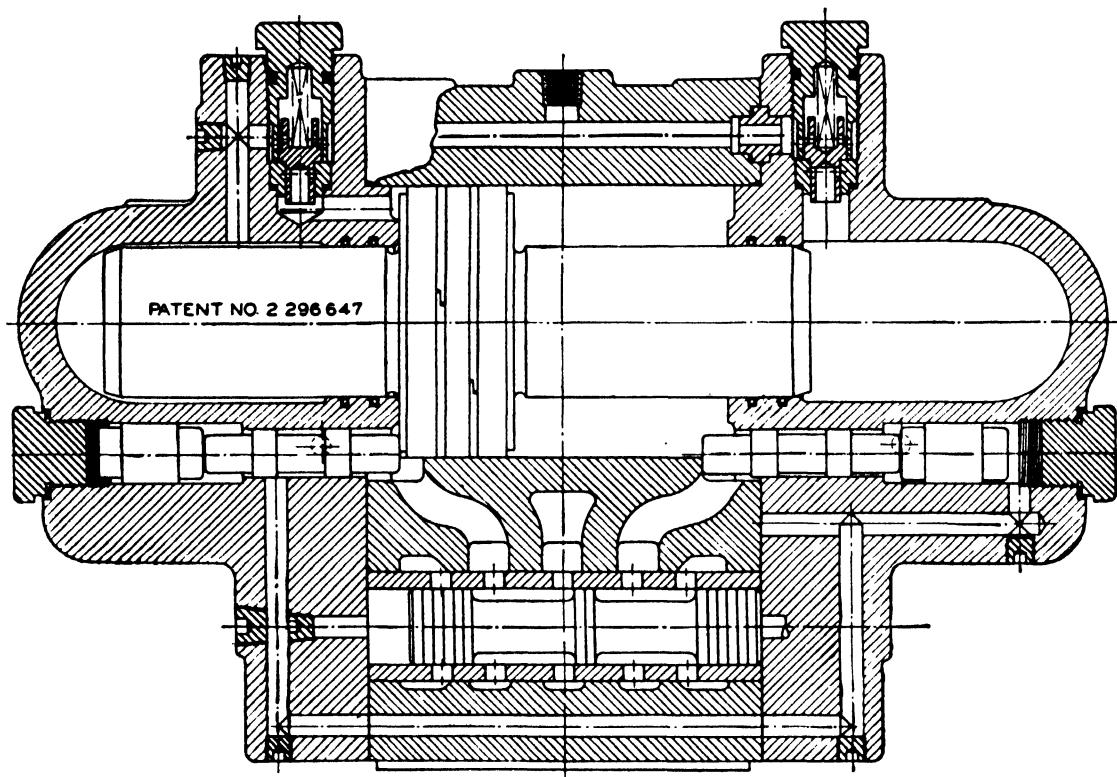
Hydraulic pressure booster, sectional diagram. (*Racine Tool and Mfg. Co., Racine, Wis.*)
